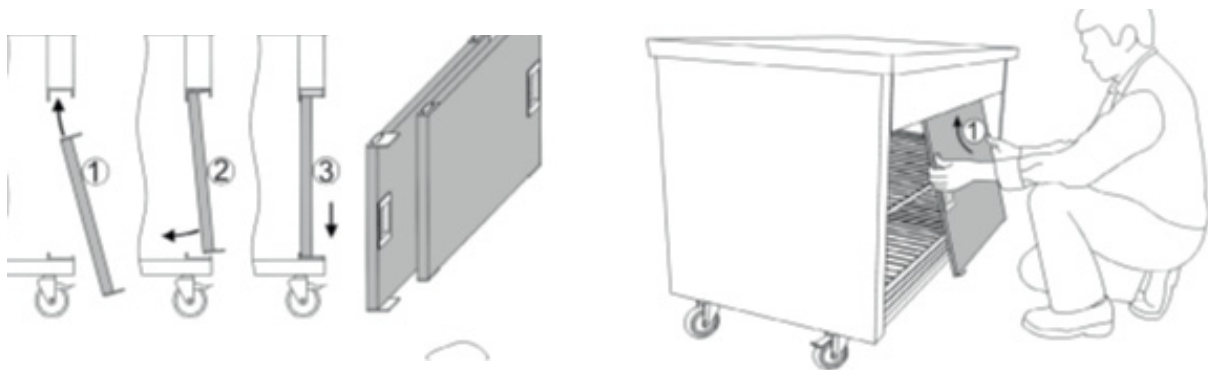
demonstrates the fitting of the cupboard doors; in this case, the rear door (Door A).
